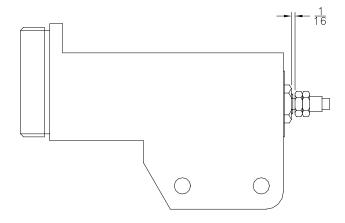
Air Before Fluid Adaptor (Piston Housing not shown for clarity)
